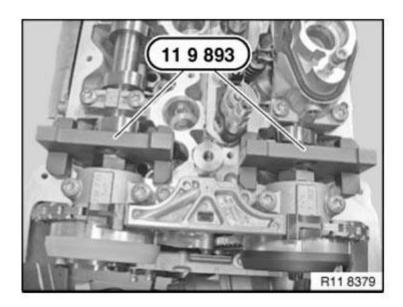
Blocking Intake Camshaft Using Special Tool 11 9 893 Courtesy of BMW OF NORTH AMERICA, INC.
